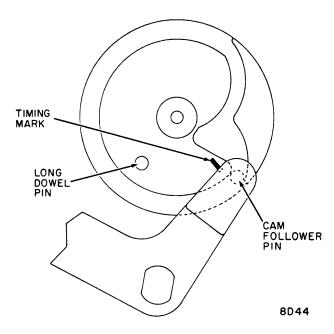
Cam Position for Adjusting Brush Cycle Switch
